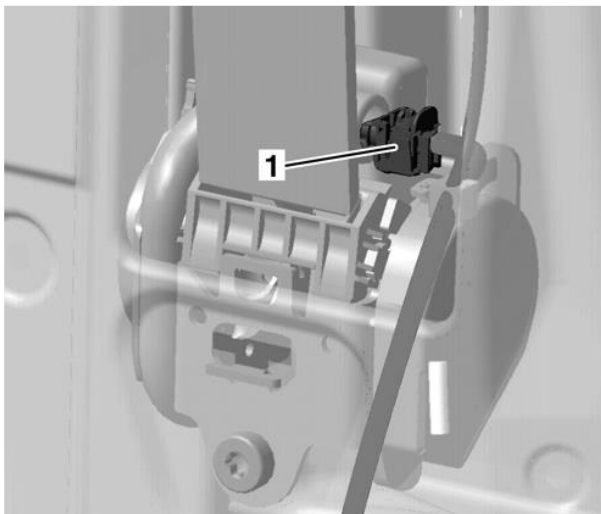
Automatic belt retractor with pyrotechnical belt tensioner
